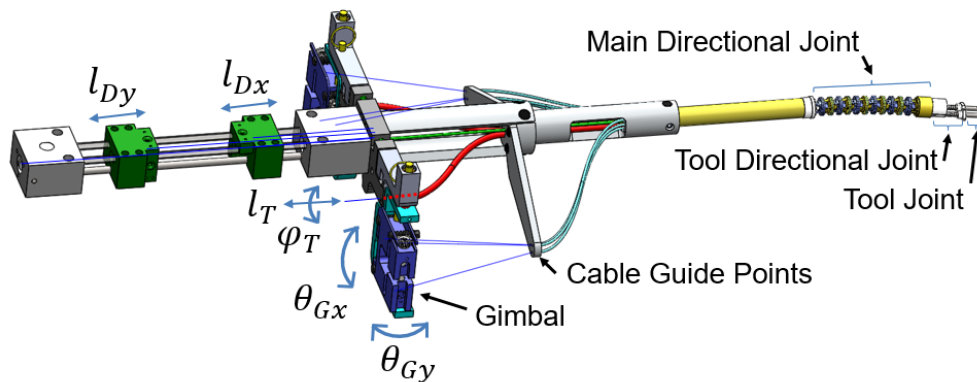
Tool assembly. l_{Dx} and l_{Dy} control the main directional joint, θ_{Gx} and θ_{Gy} control the tool directional joint and l_T and ϕ_T are for the tool insertion and rotation.
